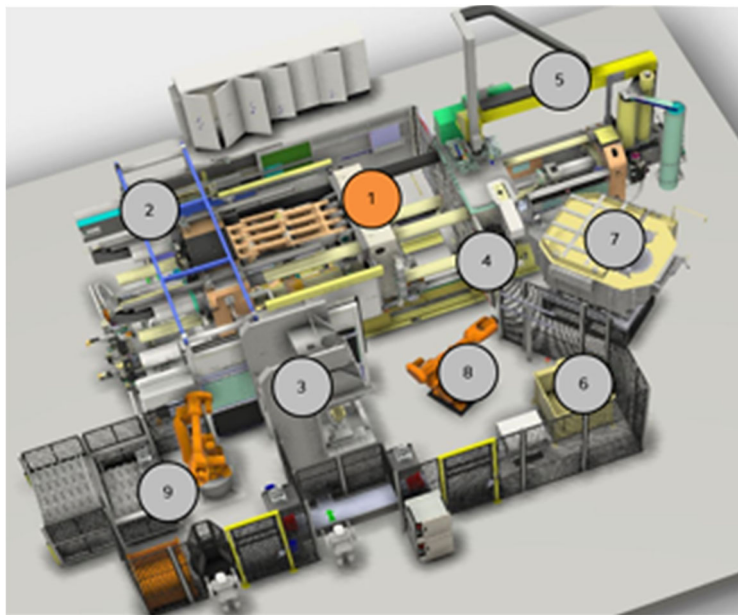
Schematic view of individual devices in the casting workplace: (1 – high pressure casting machine, 2 – machine extraction, 3 – cutting press, 4 – data matrix code punch, 5 – foundry mould treatment manipulator, 6 – cooling bath, 7 – holding furnace, 8 – handling robot, 9 – robotic, automatic palletizing)
